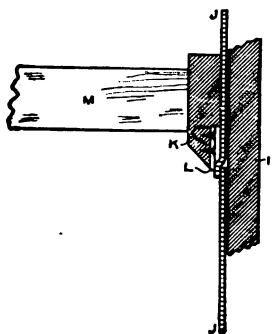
Method of Keeping Lead in Place While Making Upright Seam in Tank.
